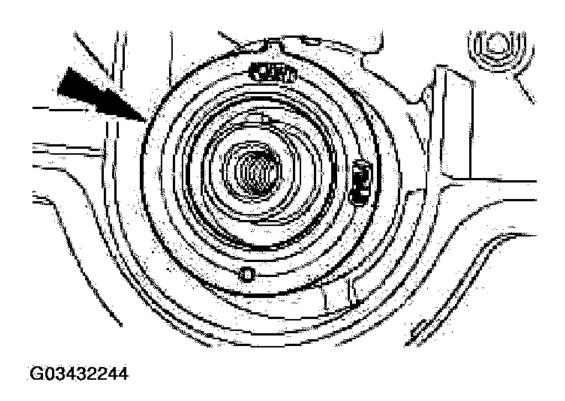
Installing Crankshaft Timing Belt Pulley Courtesy of FORD MOTOR CO.
